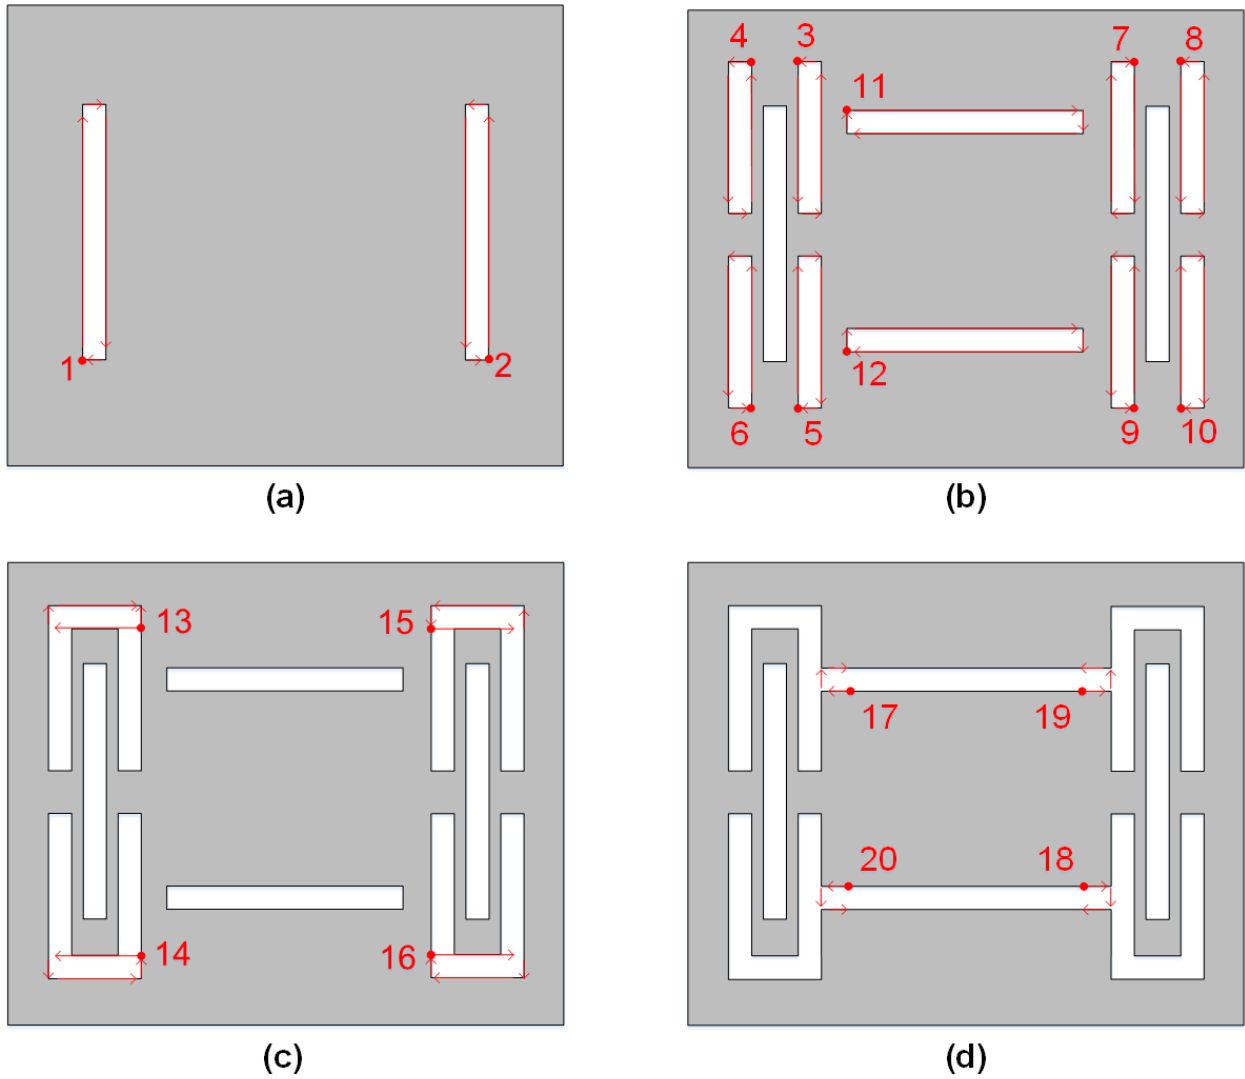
One example of cutting paths and sequences with wire EDM in fabricating the metal shear sensor.
